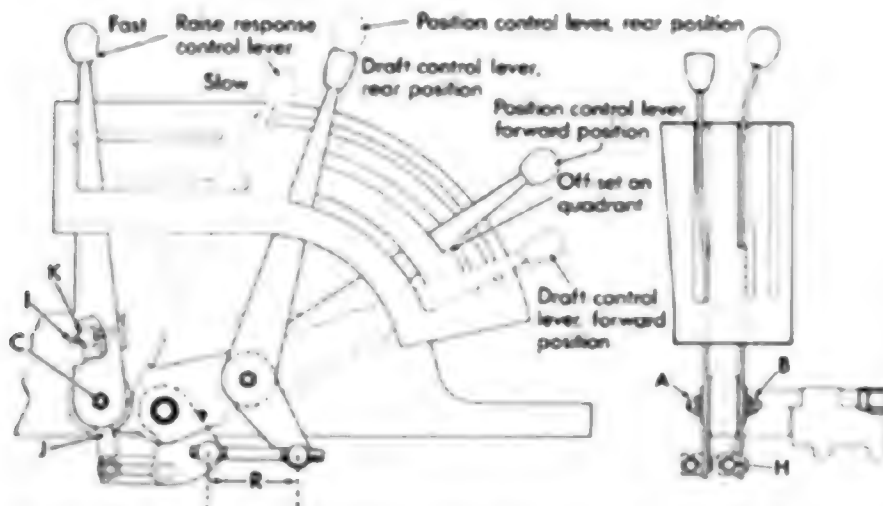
View showing adjusting points on hydraulic lift controls. Nominal setting at point (R) is: Position control 3-5/16 inches and draft control 3-13/32 inches. Refer to text.
